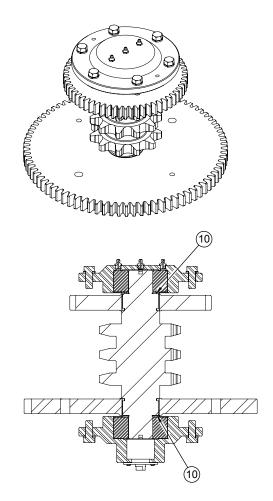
2000-7000-02 Swivel Support Assembly
